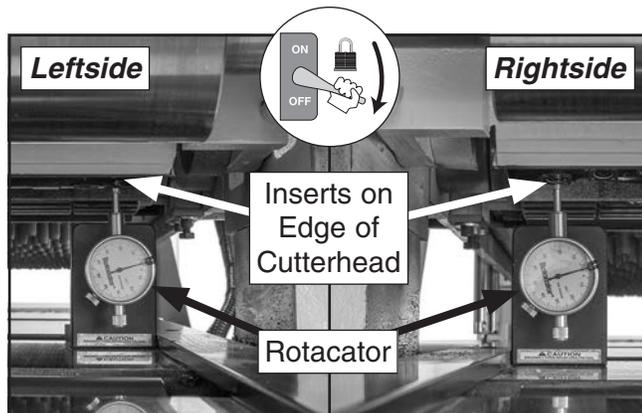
Rotacator placed under inserts on edge of upper cutterhead.
